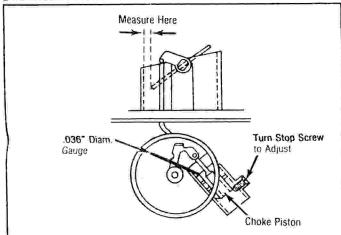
Choke Pull Down Adjustment (Late Integral Piston Type)
